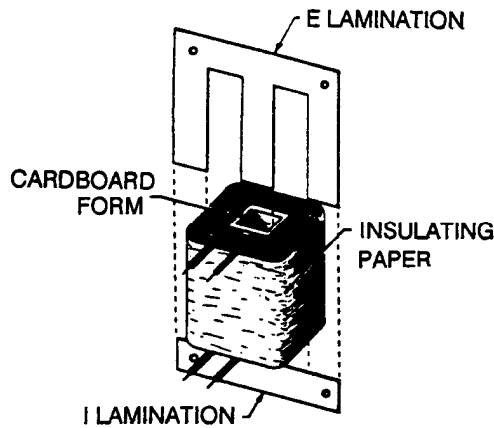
Exploded View of Shell-Type Transformer Construction.
